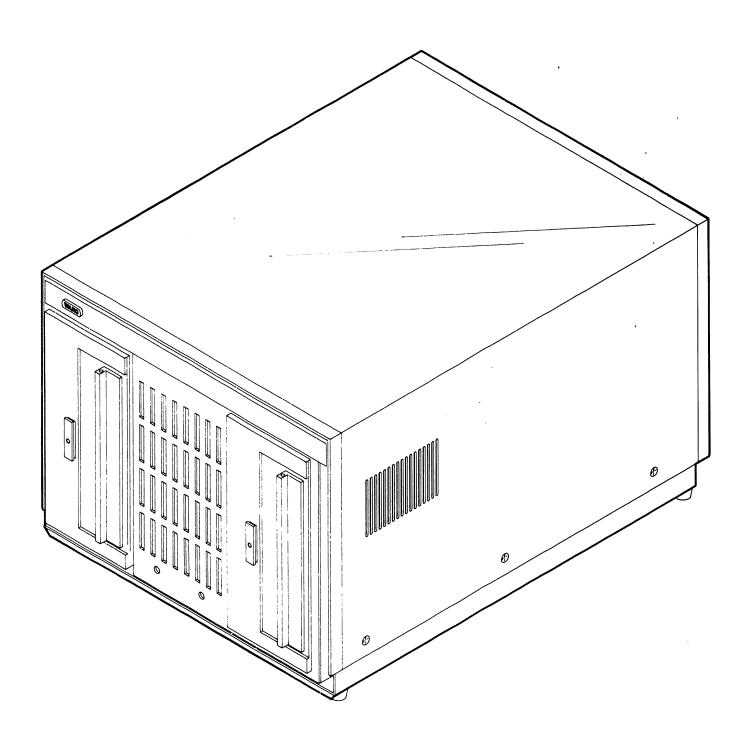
POWER SUPPLY ASSEMBLY (ASSEMBLY PART NO. 270-0371)
